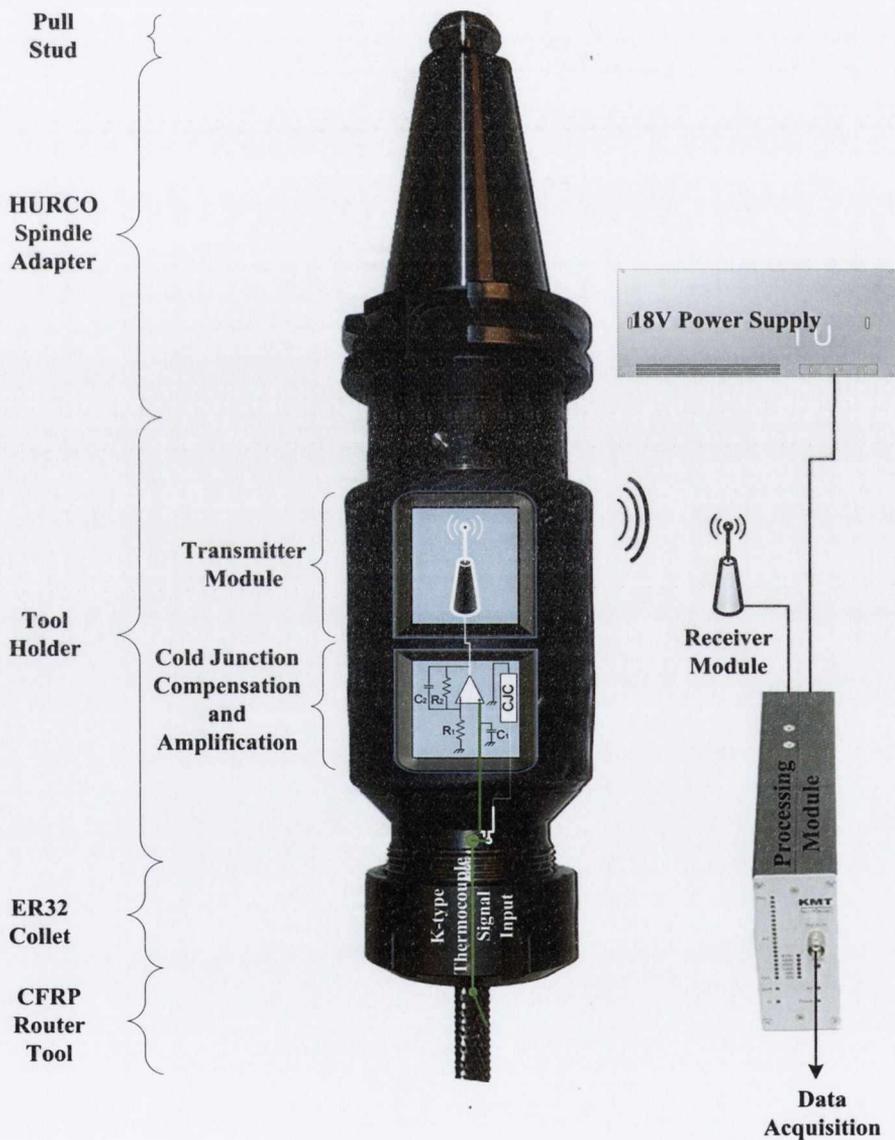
Telemetry system and components required to deliver thermocouple signals from the cutting tool to DAQ.
